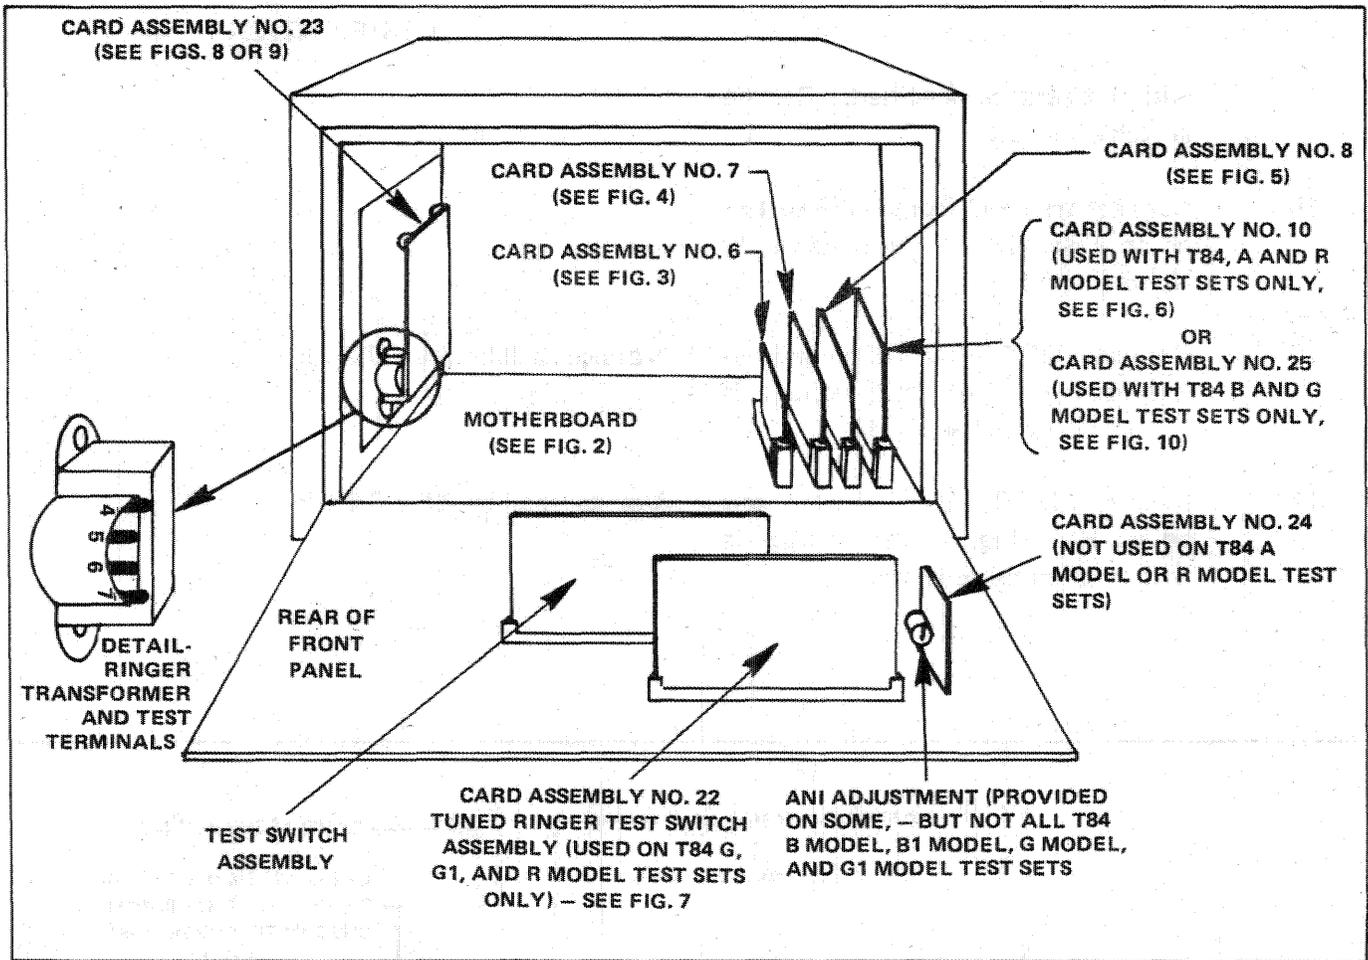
Location of Major Assemblies, Seiscor T84 Series Telephone Test Sets
